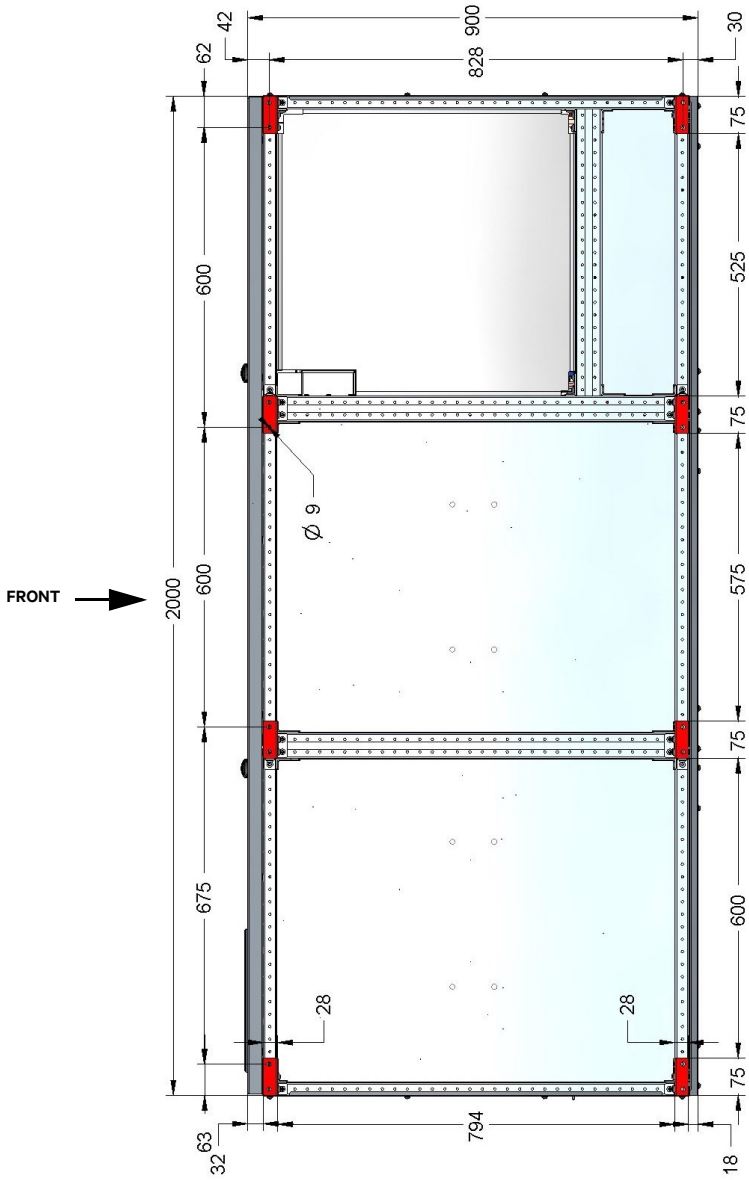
Liebert EXL S1 800kVA bottom view (footprint and floor mounting holes)
